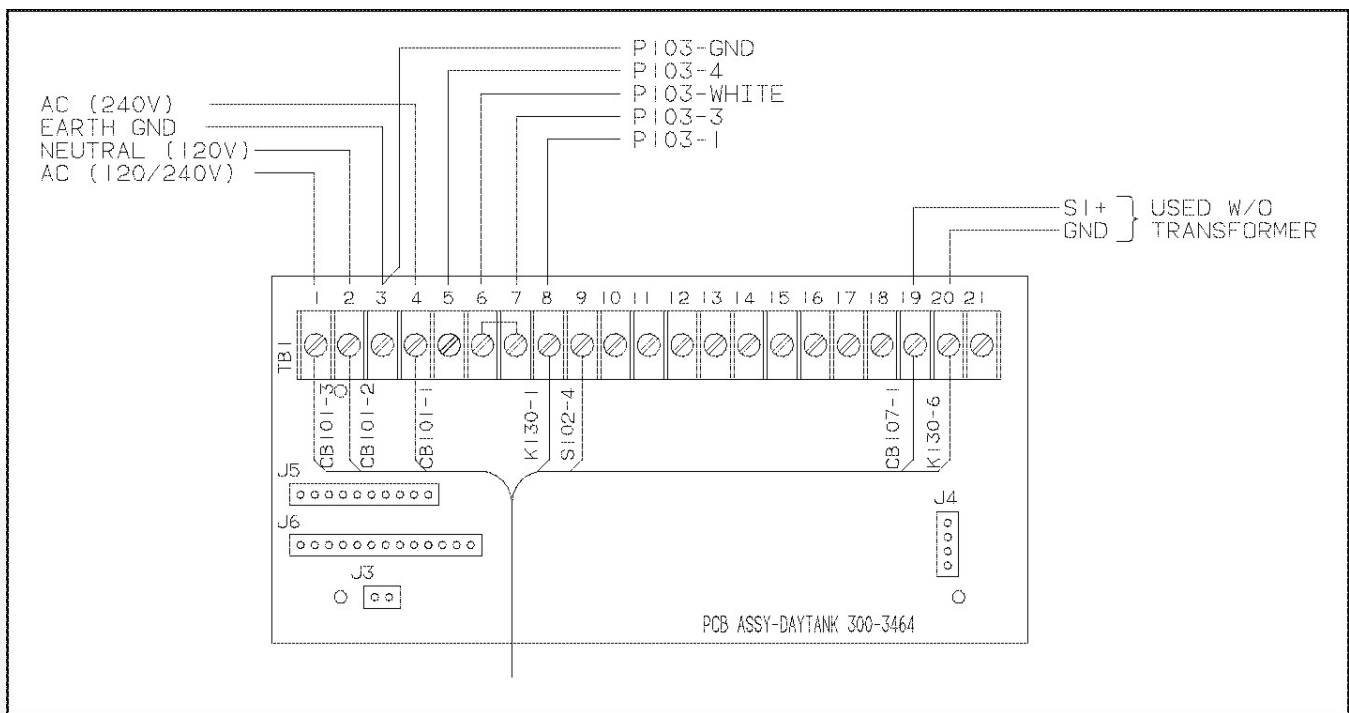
FUEL PUMP CONTROL TERMINAL BOARD
